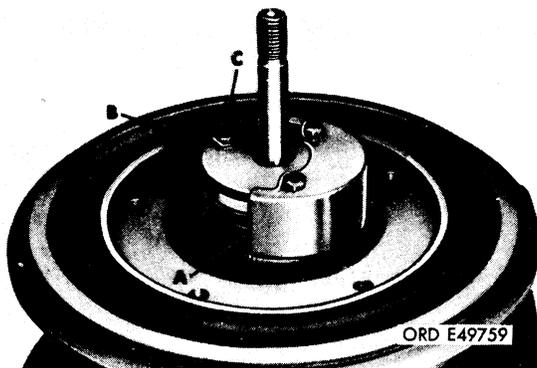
INSTALLING OIL DEFLECTOR, LOCK PLATE, AND CAP SCREWS - TURBOCHARGERS 10912638 AND 53591-C-139552.
